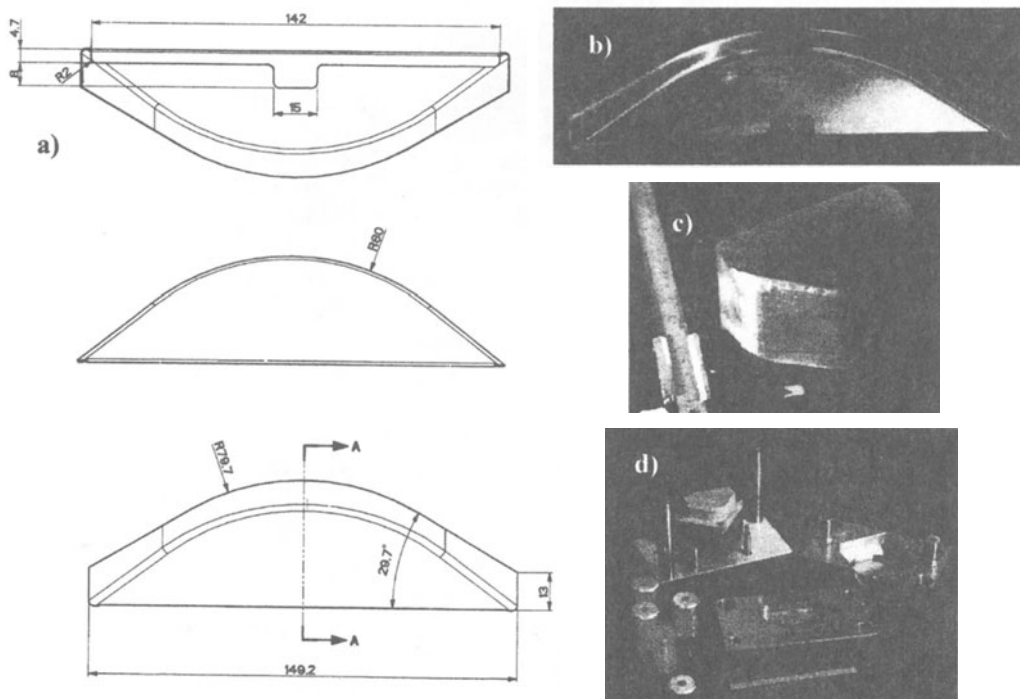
a), b) The hood cap selected as benchmark; c) punch model built by stereolithography technique; d) the disassembled modular die.
